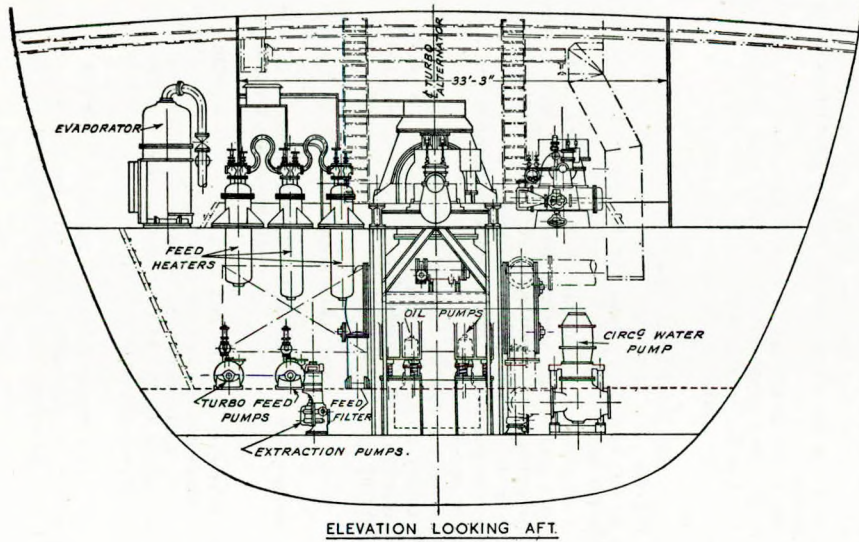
Arrangement of machinery for 6,800-s.h.p. turbo-electric ship.
